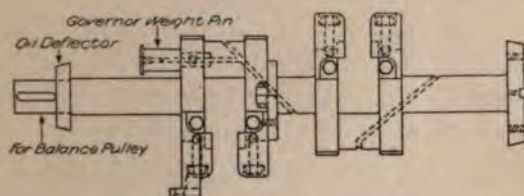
Crank shaft, M. P. 10-100-350 set.
